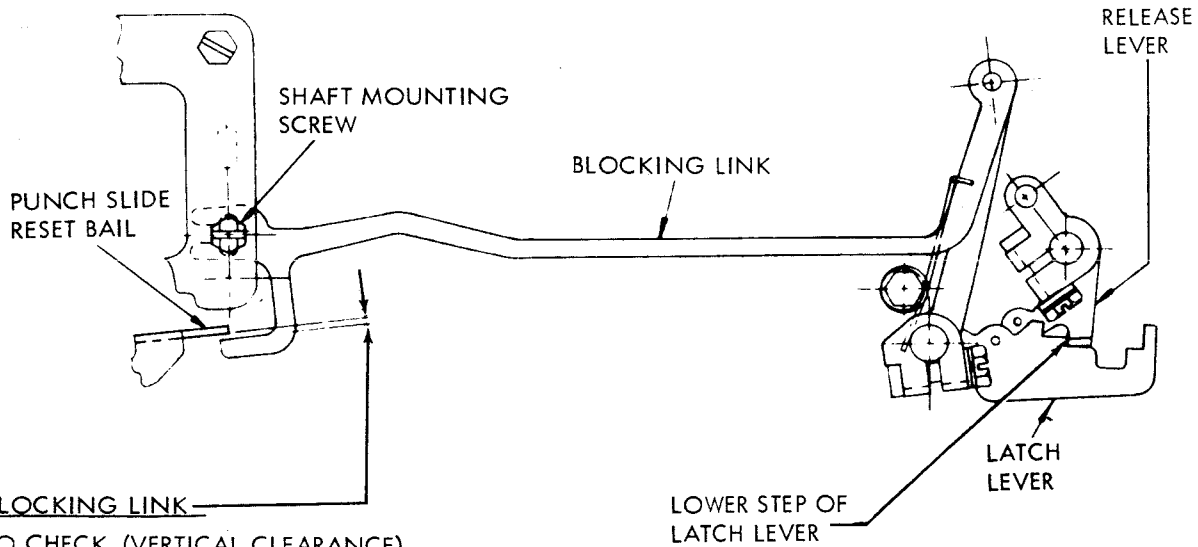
K. TYPING REPERFORATOR TT-375/UG, REMOTE CONTROL NON-INTERFERING BLANK TAPE OUT MECHANISM
